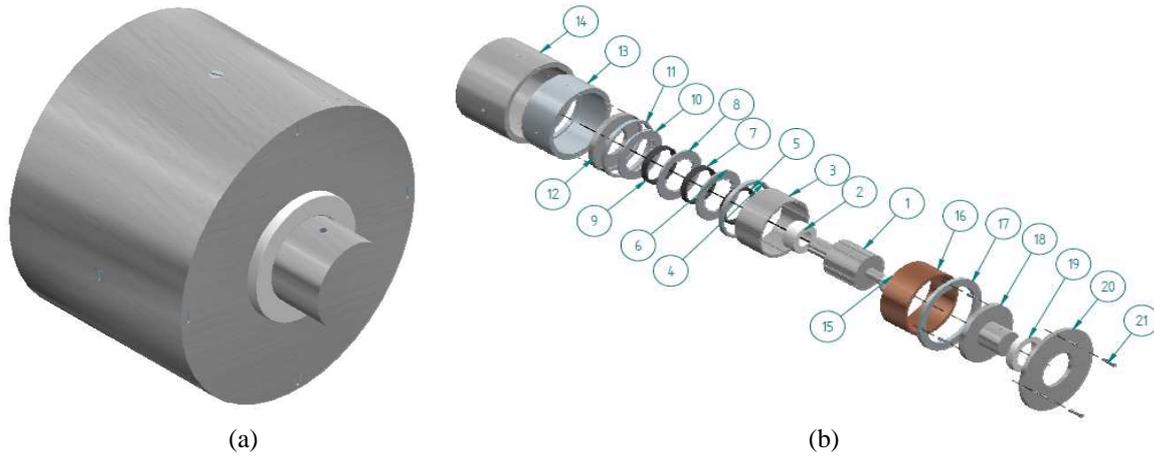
MR clutch CAD model. (a) Isometric view. (b) Exploded view.
